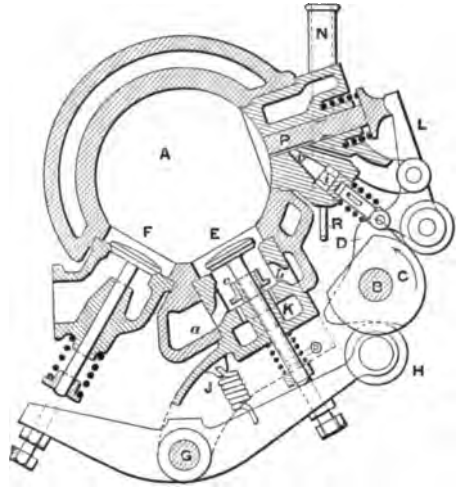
VALVE GEAR DETAIL OF ROLLASON ENGINE.
